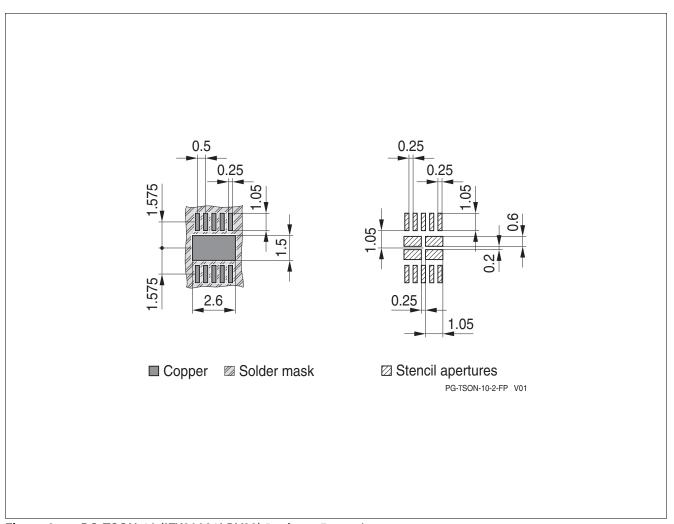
PG-TSON-10 (IFX30081LDV33) Package Footprint
